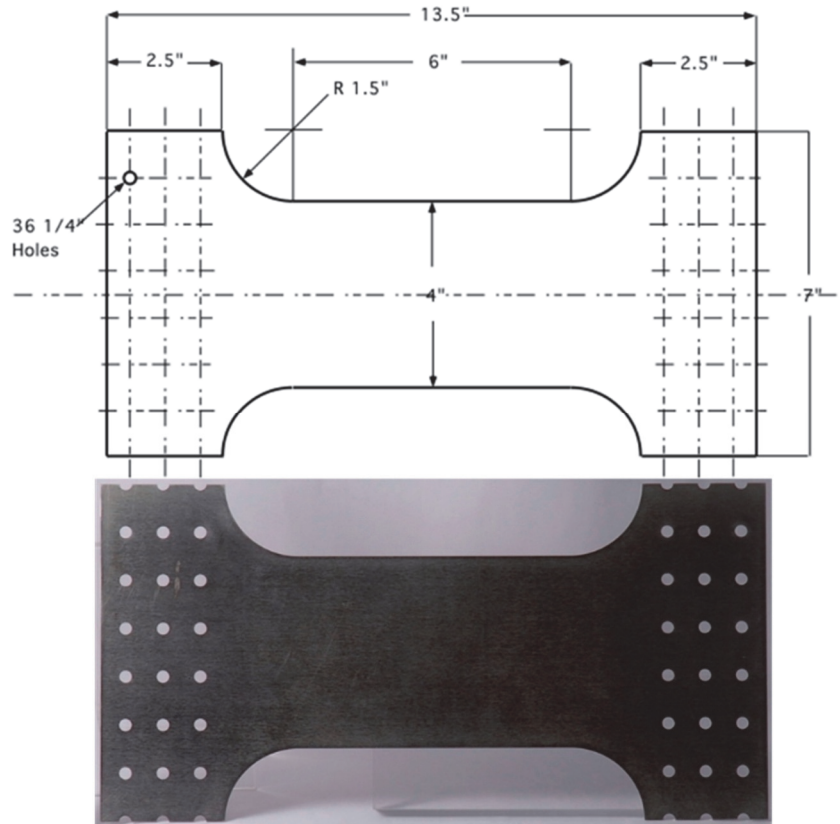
Panel test geometry including hole locations for custom mounting fixture
